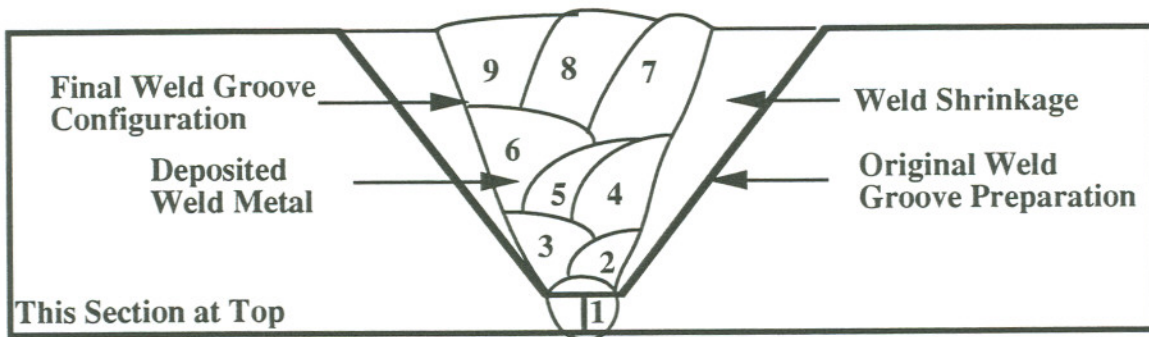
Nine-Pass Weldment Pass Sequence
